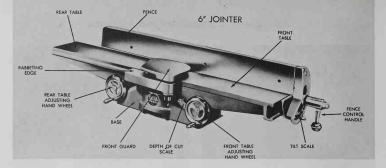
The parts of a jointer. (Rockwell Mfg. Co.)
